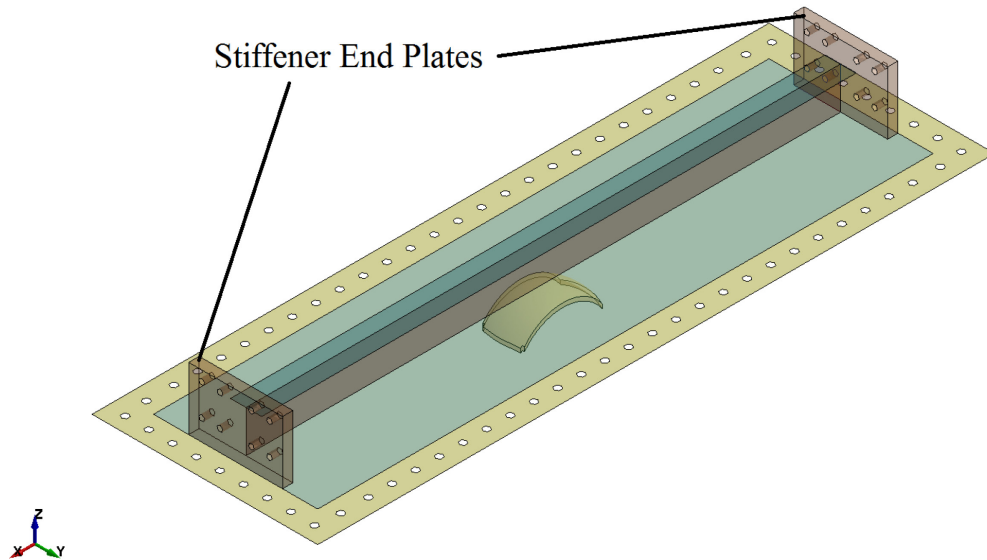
Framed specimen geometry shown with stiffener end plates.
